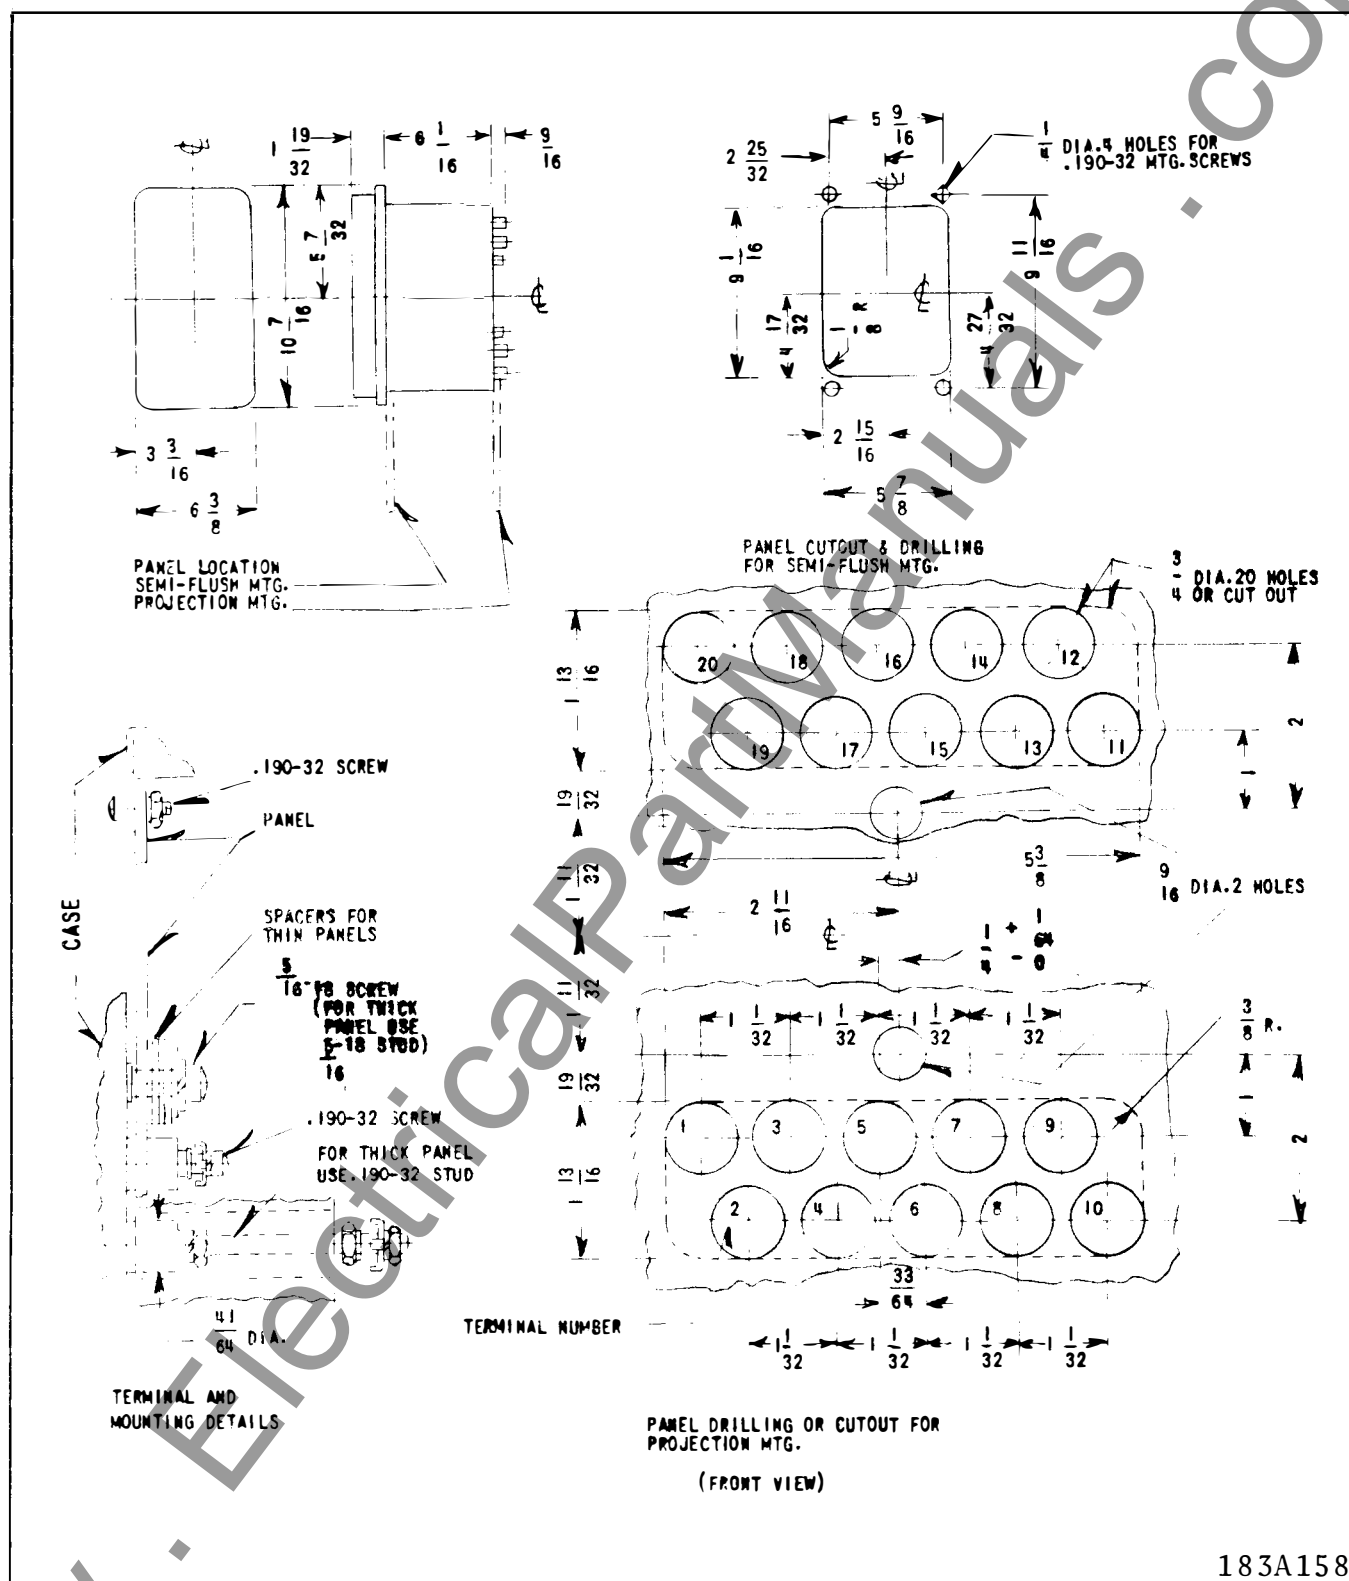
Type AR Relay - Molded Base Rear Connected Outline &amp; Drilling Plan.
